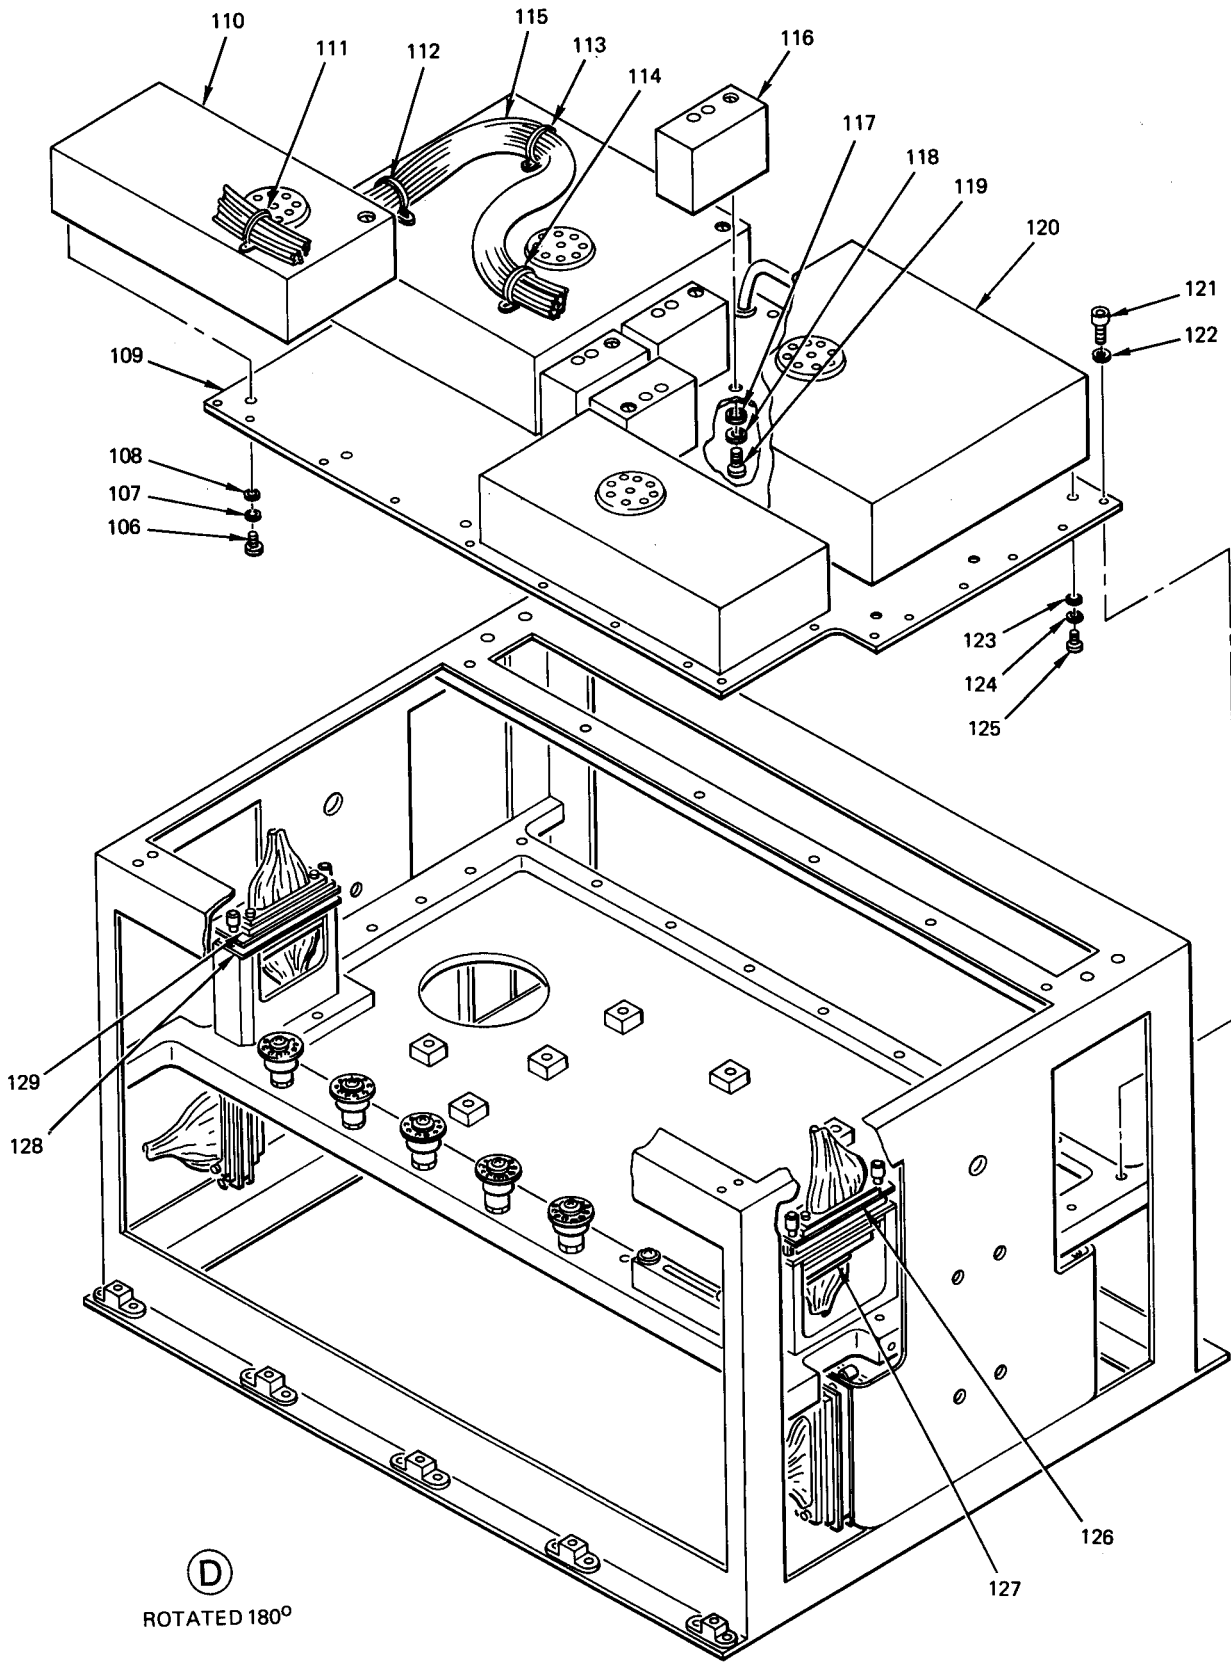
Signal Processor Unit Exploded View (Sheet 4 of 4)
